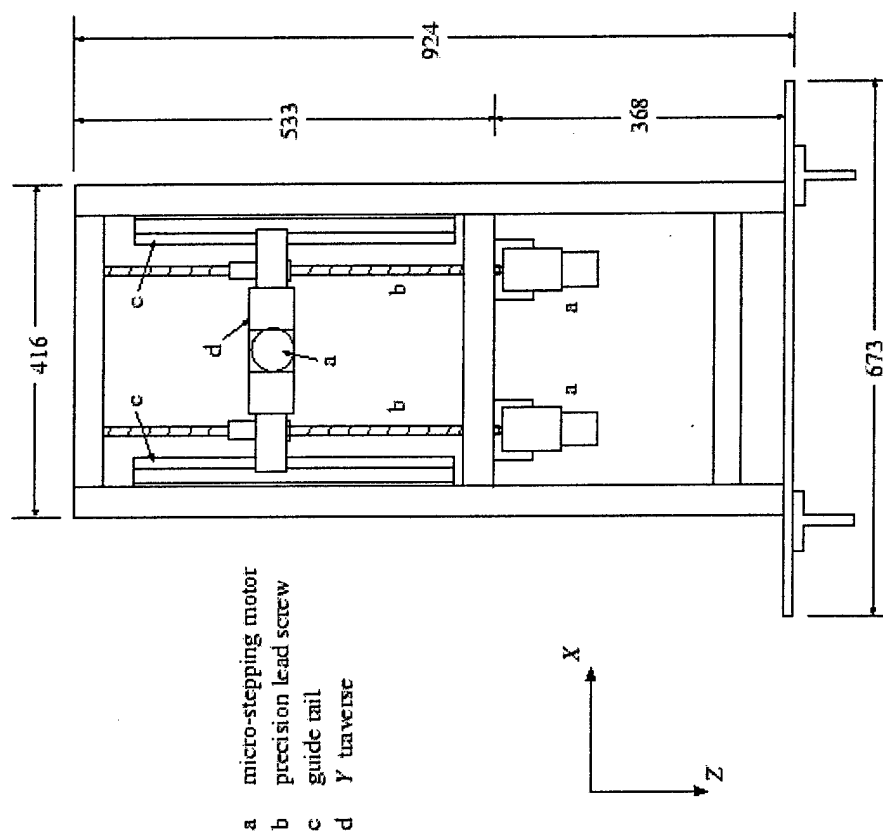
Front view of the traverse structure. All dimensions in millimeters.
